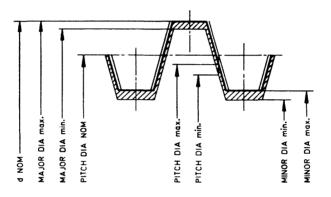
EXTERNAL THREADS WITH TOLERANCE POSITION & FOR MAJOR AND MINOR DIAMETER AND TOLERANCE POSITION & AND C FOR PITCH DIAMETER
